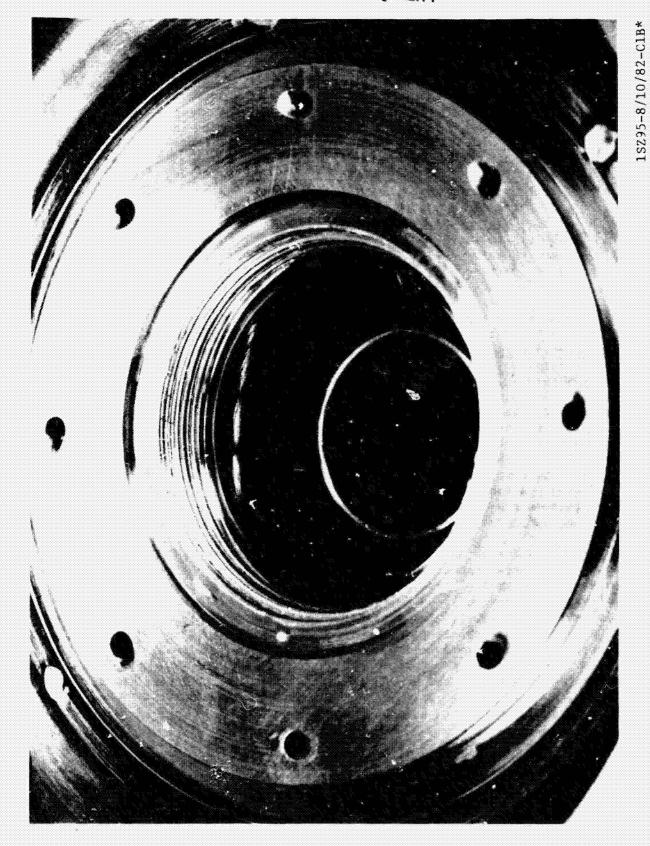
Pump Inlet Housing - Front Labyrinth Seal Damage
